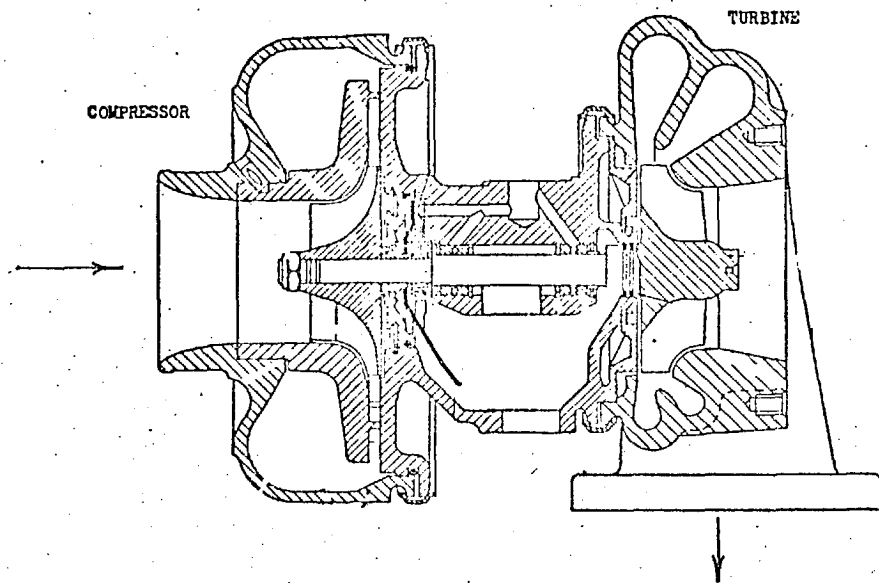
Typical Turbocharger for Automotive Diesel Engines
